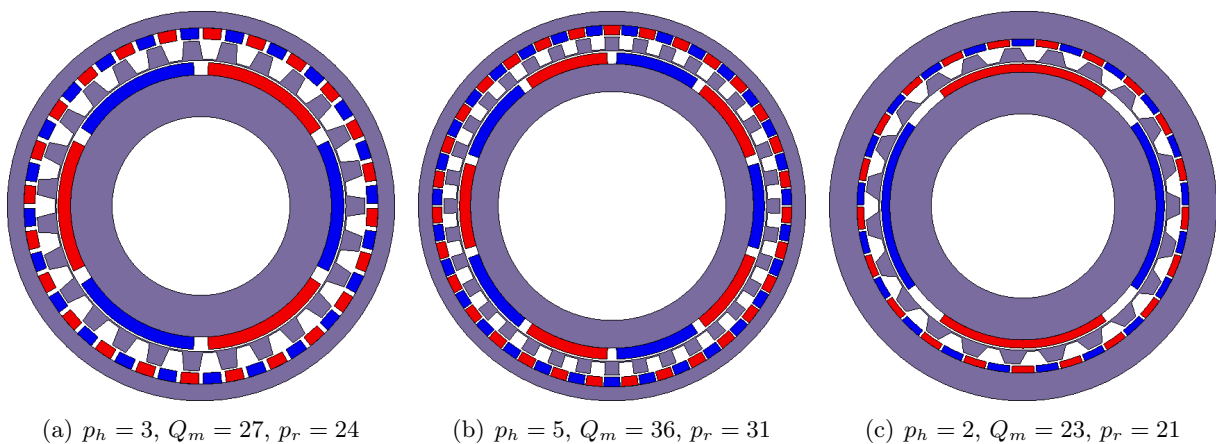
Cross sectional views of three magnetic gear designs with an outer diameter of 140 mm. Design A corresponds to the gear investigated in section 6.3.
